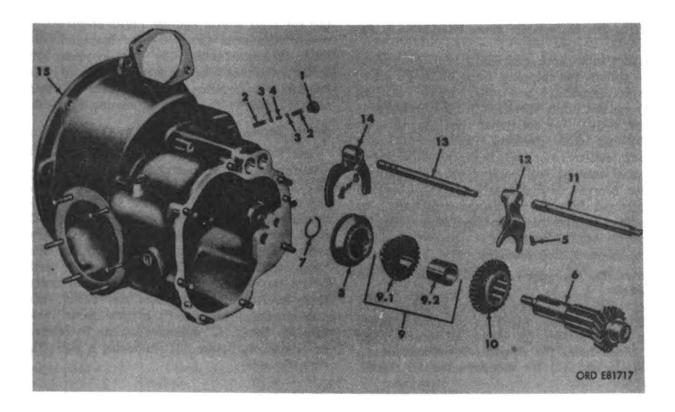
Drive pinion, low-speed spur gear, high-speed spur gear, and related parts—capleded view.
